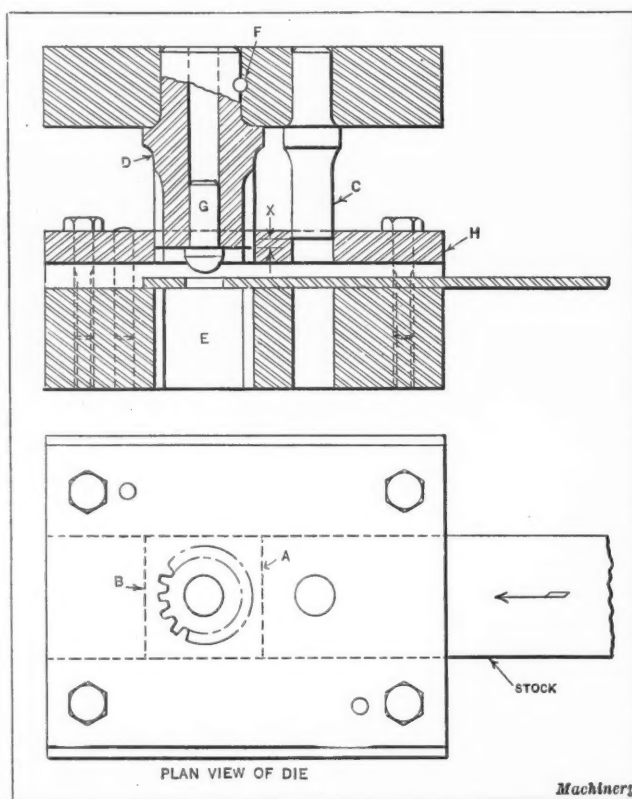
Progressive Blanking Die which pierces the Hole at the Center of the Gear and blanks the Teeth
